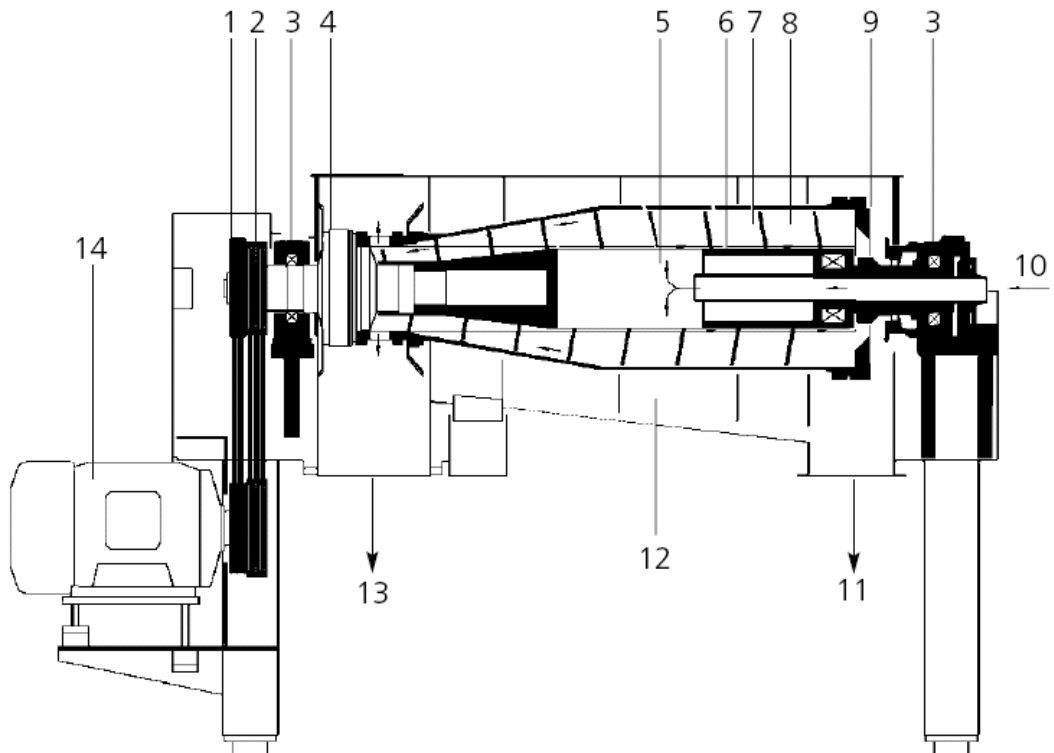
Constructional features of GEA Westfalia UCA 501. 1) Conveyor screw drive. 2) Bowl drive. 3) Bowl bearings. 4) Gear. 5) Distributor. 6) Conveyor screw. 7) Centrifugation space. 8) Bowl. 9) Regulating plate. 10) Feed. 11) Discharge of the clarified liquid. 12) Frame. 13) Solids discharge. 14) Drive motor.
